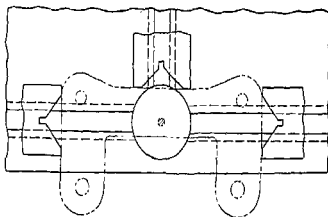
Universal holder for piercing single holes. (General Electric Co.)
